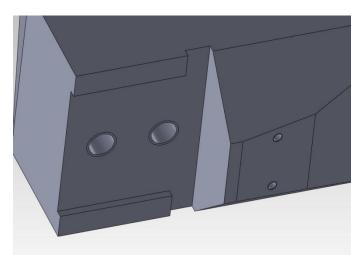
The picture shows a detailed view of the arm from below showing the interface for both Shoulder Holder and Wire Guide
